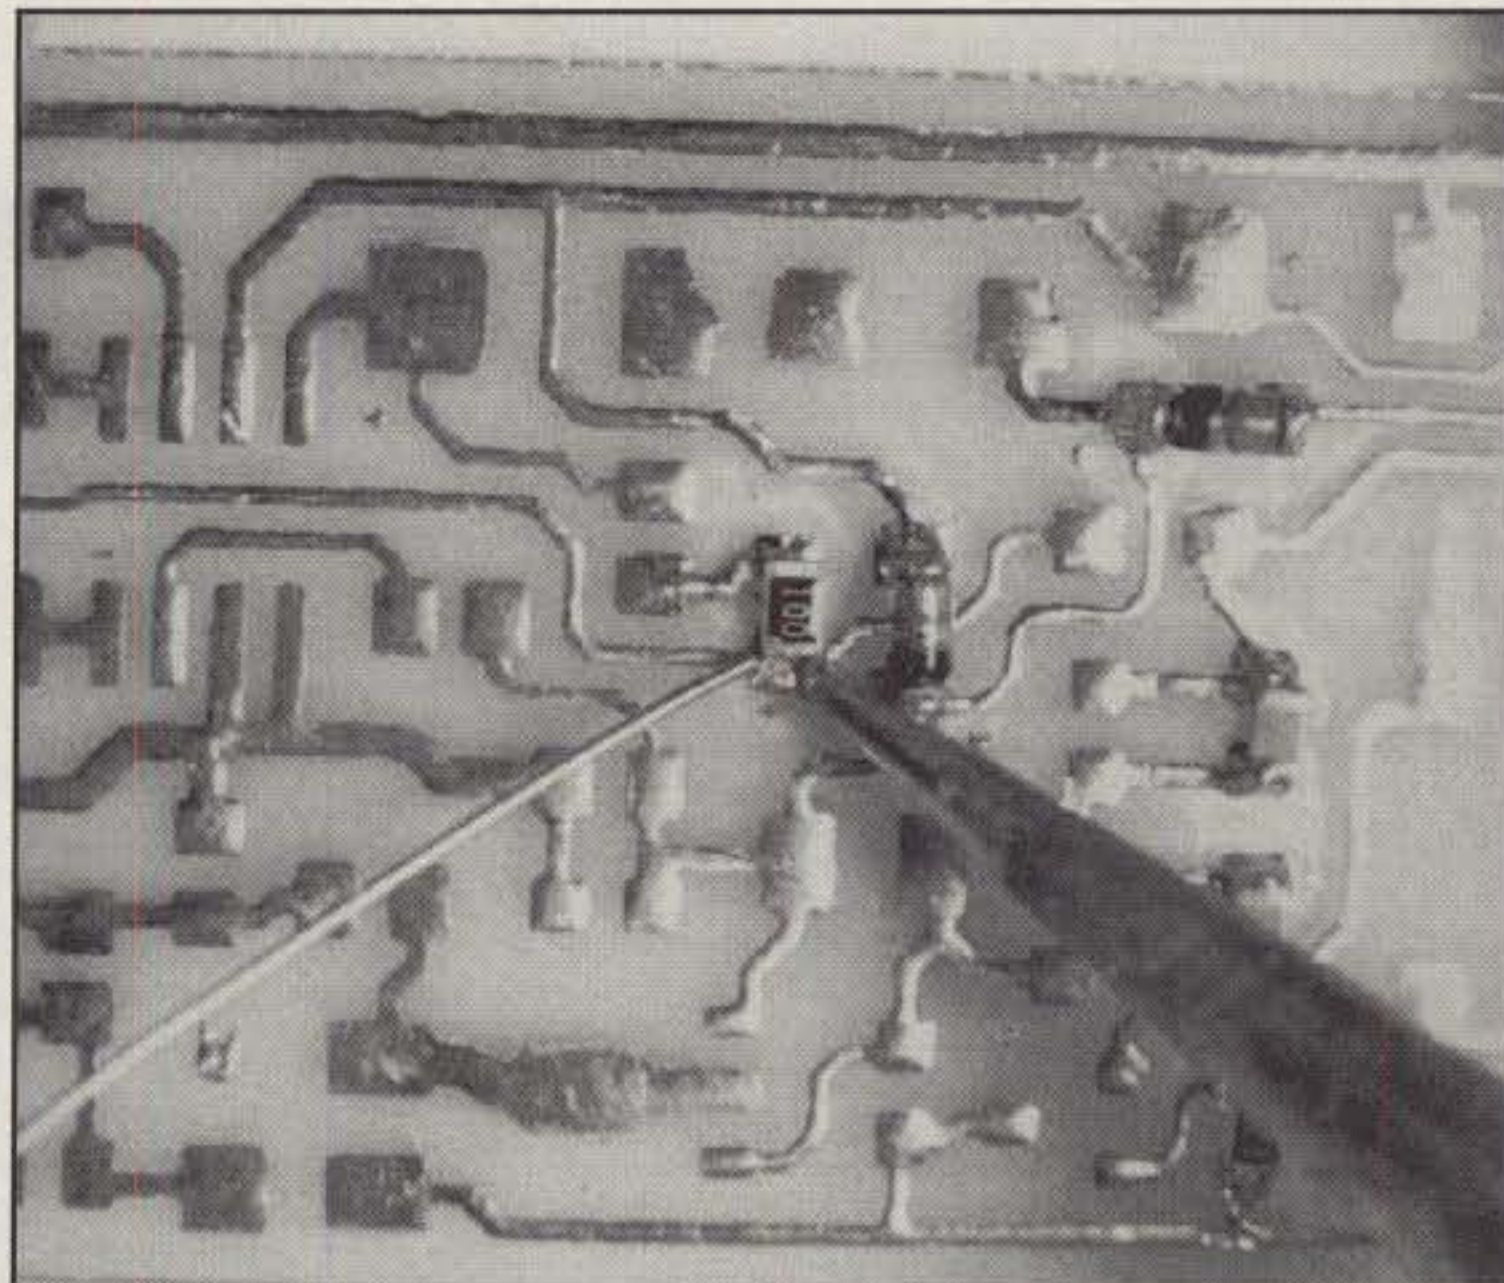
Now Bob is quickly soldering the resistor's other end terminal and PC board pad with a pinpoint-tip iron. Surface-mount components readily accept solder, so only an accurate "in and out" touch is required. Otherwise, excess solder will cover the resistor.
